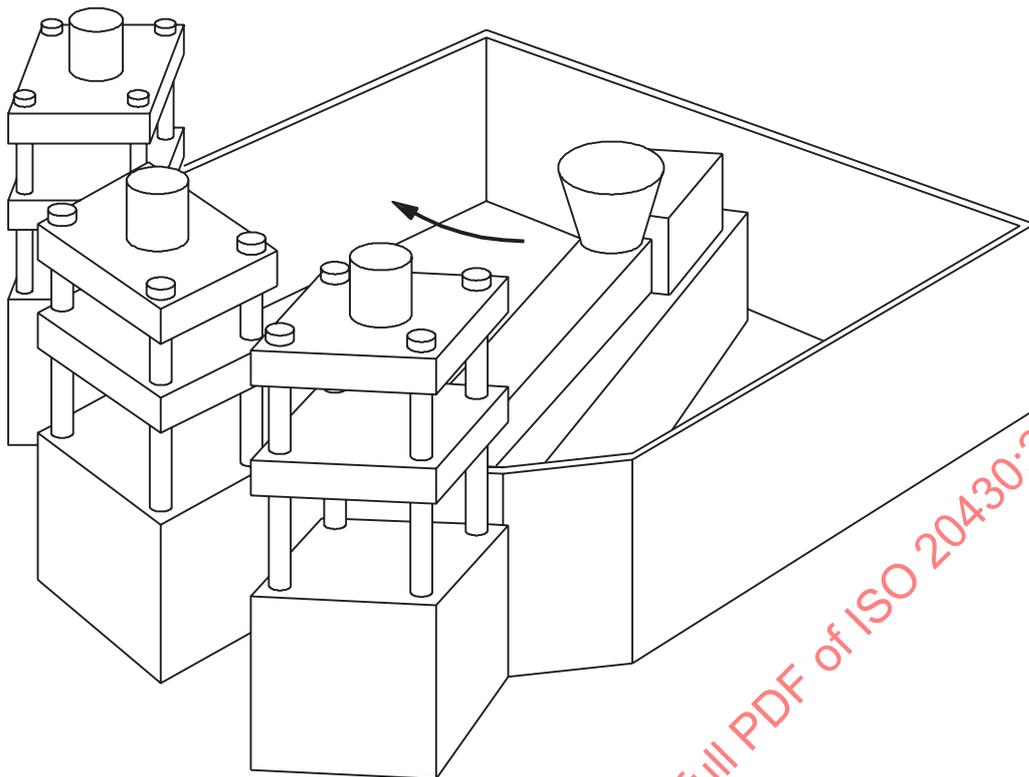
Example of multi-station machine with mobile injection unit, shown without guards for the clamping units
